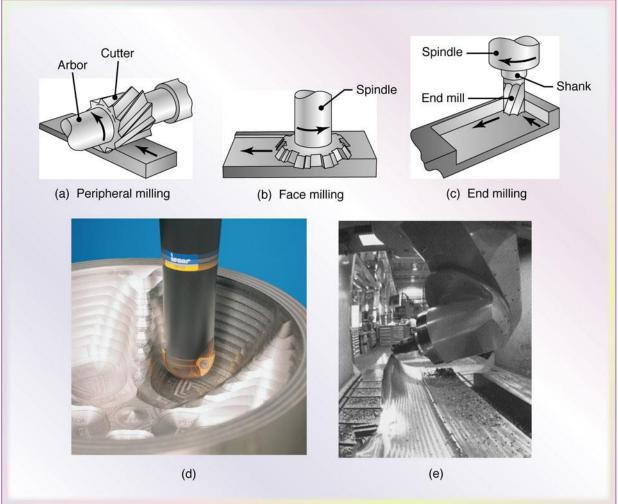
Some basic types of milling cutters and milling operations. (a) Peripheral milling. (b) Face milling. (c) End milling. (d) Ball-end mill with indexable coated-carbide inserts machining a cavity in a die block. (e) Milling a sculptured surface with an end mill, using a five-axis numerical control machine. *Source*: (d) Courtesy of Iscar. (e) Courtesy of The Ingersoll Milling Machine Co.
